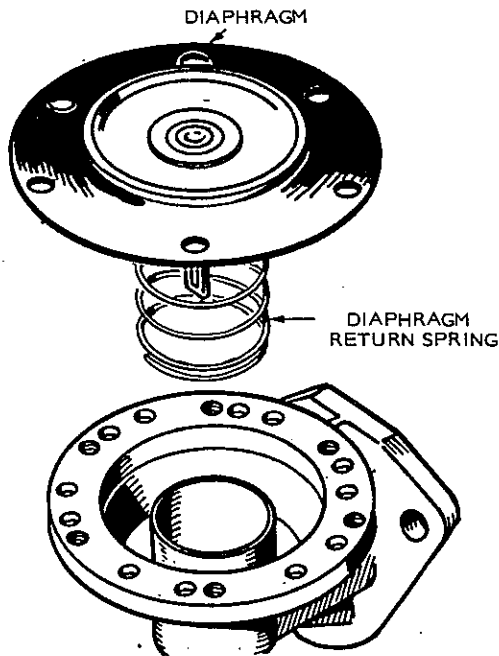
POSITIONING FUEL PUMP DIAPHRAGM
